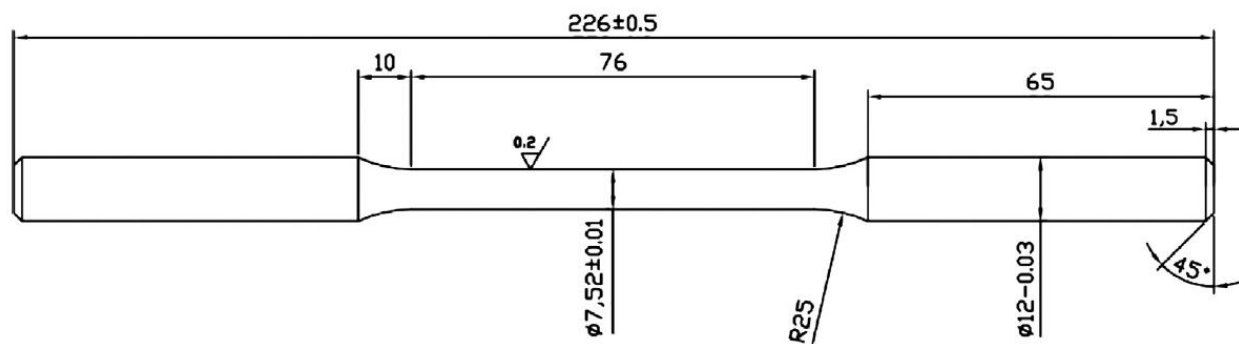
The detailed specimen geometry used for rotating bending fatigue test. All dimensions are given in mm.
